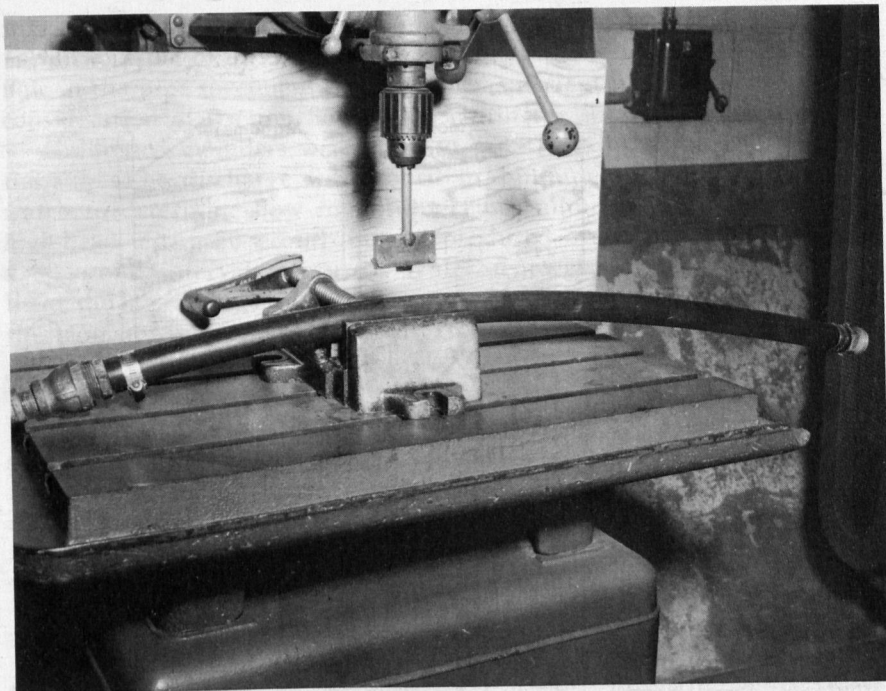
Blade clamp mounted in drill press chuck. Pipe specimen is aligned parallel to knife blade ready for blade penetration.
